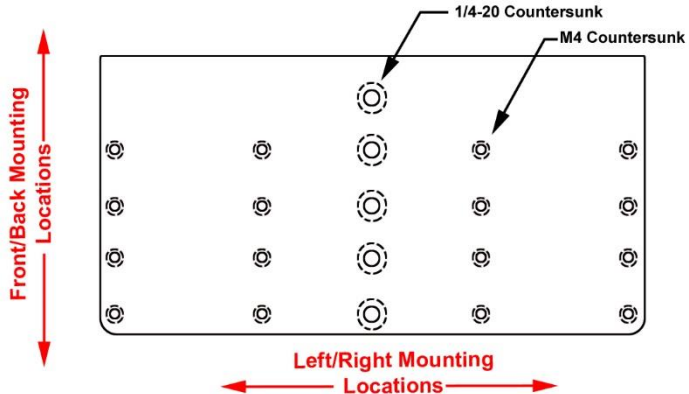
MedView Mounting Bracket Top Plate Access Holes
